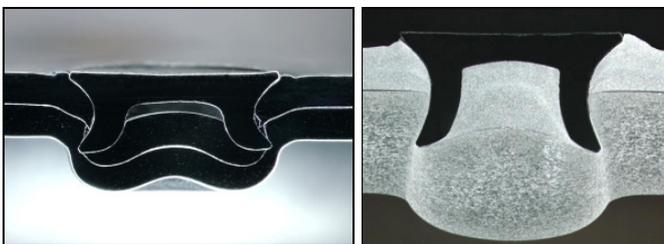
Polished sections of joints created by Hydro-Self-Pierce Riveting with wobble movement, left: a joint of steel sheets (ZStE180BH 1,2 mm / ZStE260BH 1,5 mm, pressure 1800 bar), right: a joint of aluminium sheets (AlMg3 1,5 mm / Ecodal608 4,0 mm, pressure 1200 bar)
